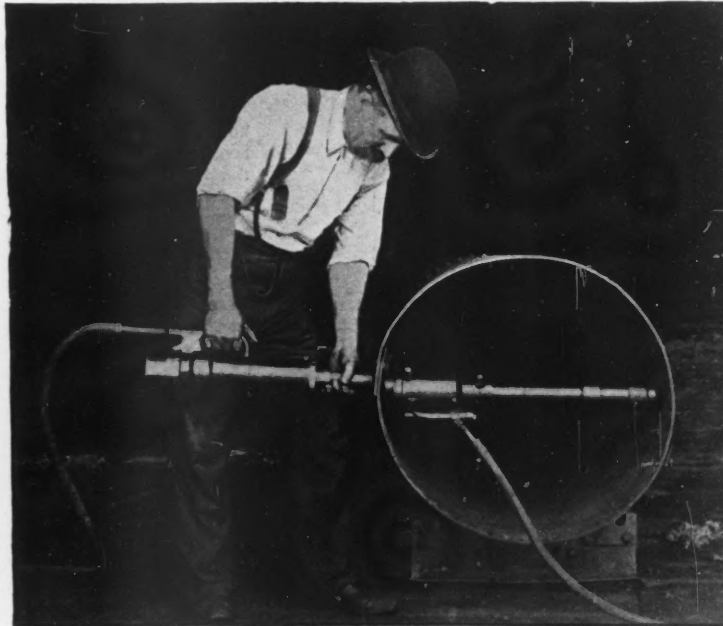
DUPLEX PNEUMATIC RIVETER AND PNEUMATIC HOLD-ON FOR BOILER WORK.
